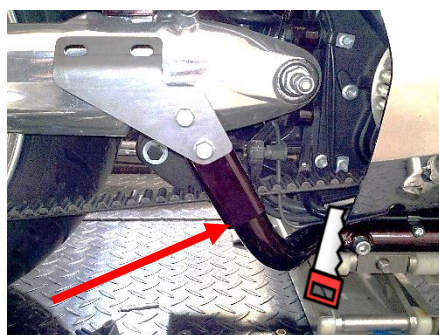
stock bar (may vary by model) sometimes this bar has been cutoff where the saw is shown
